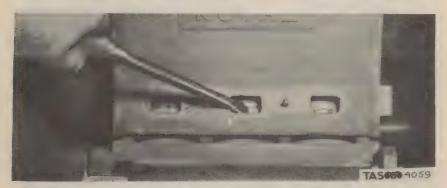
To Tighten - Insert Screwdriver in Notches and Turn to Right.
